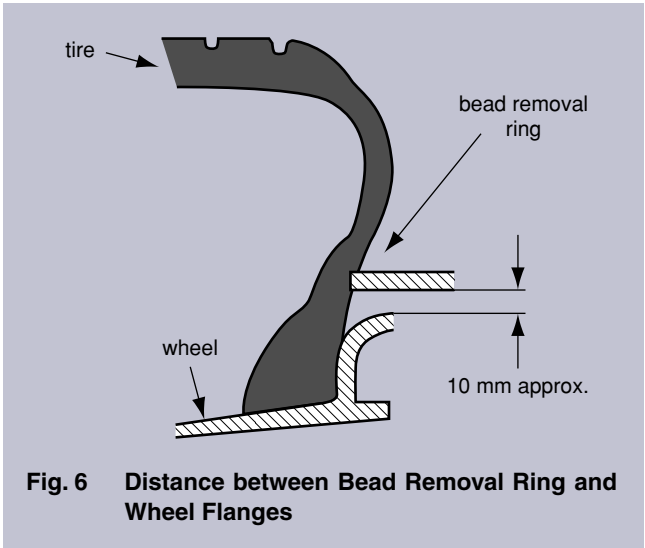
Distance between Bead Removal Ring and Wheel Flanges
